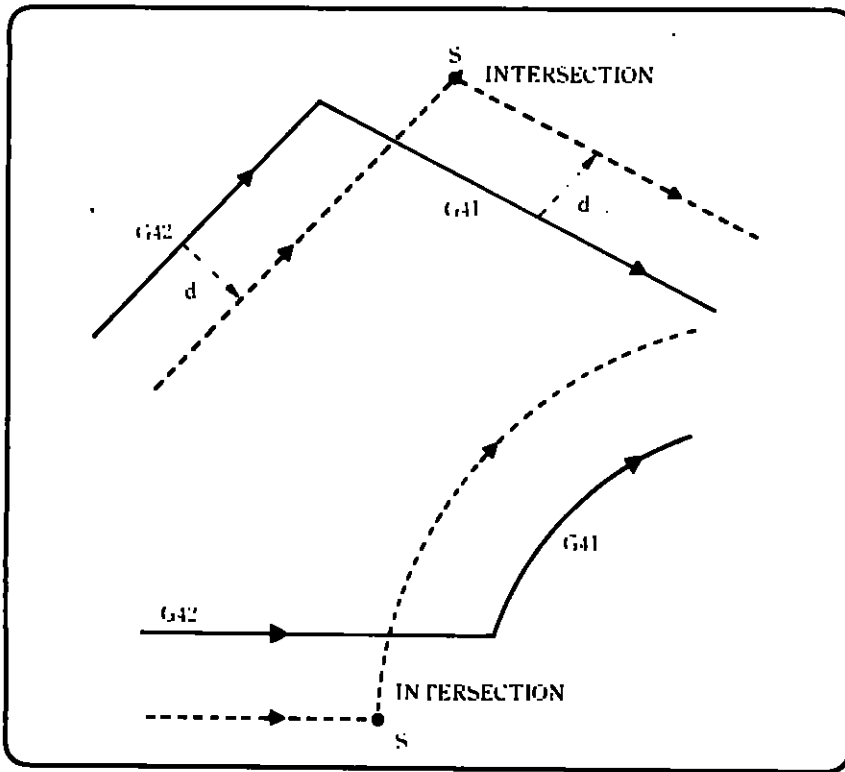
Switching at Intersection of Tool Center Path
